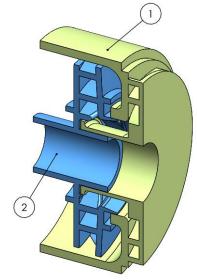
A three-dimensional model of a submersible centrifugal pump section 1 - guiding device; 2 - impeller
